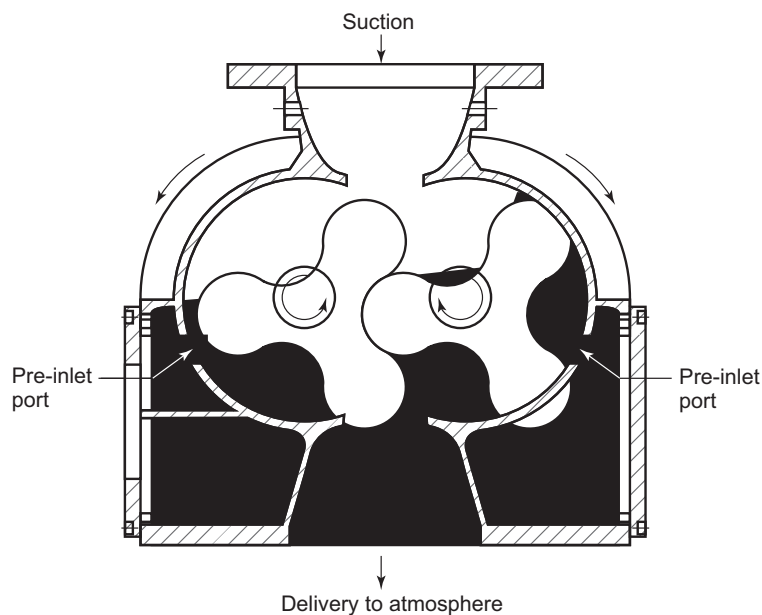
Rotary Lobe Blower (Three-lobe Impeller)
